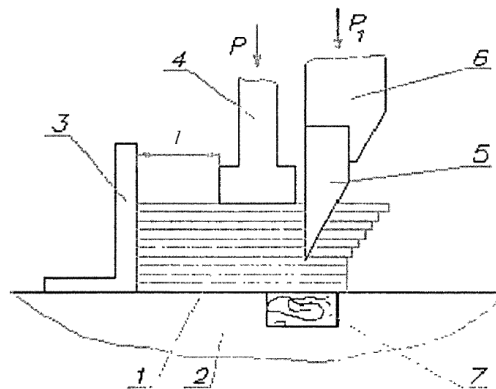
Cutting sheets in the table: P - clamping force; P_1 - cutting force
